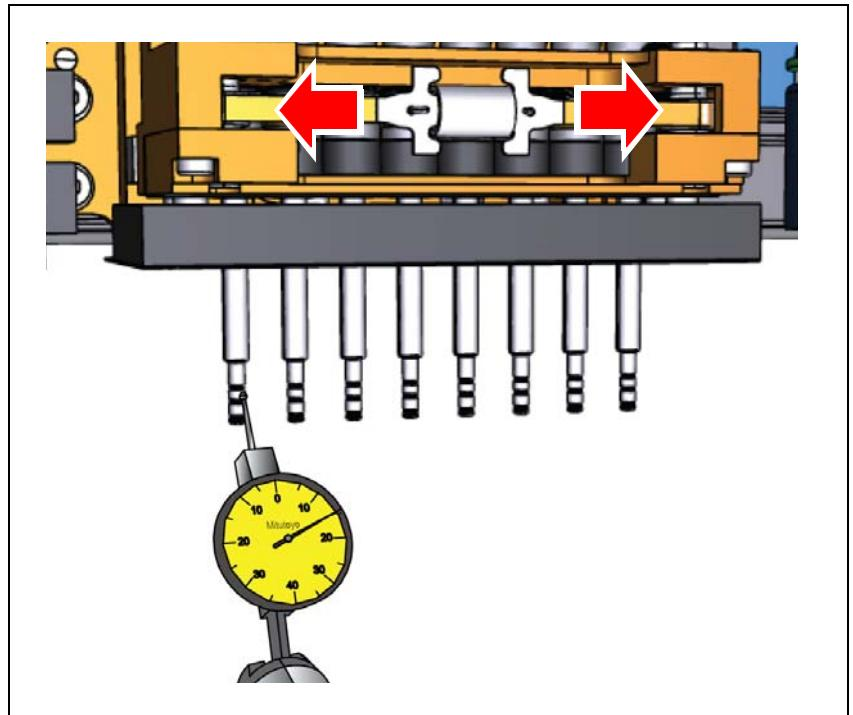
Position the dial indicator at HYDRA tool 1.
